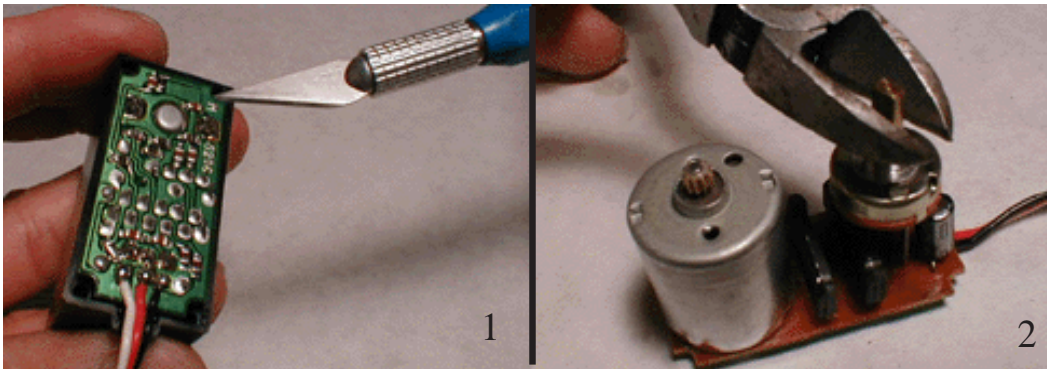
Cutting the shaft of the potentiometer with wire cutters.
